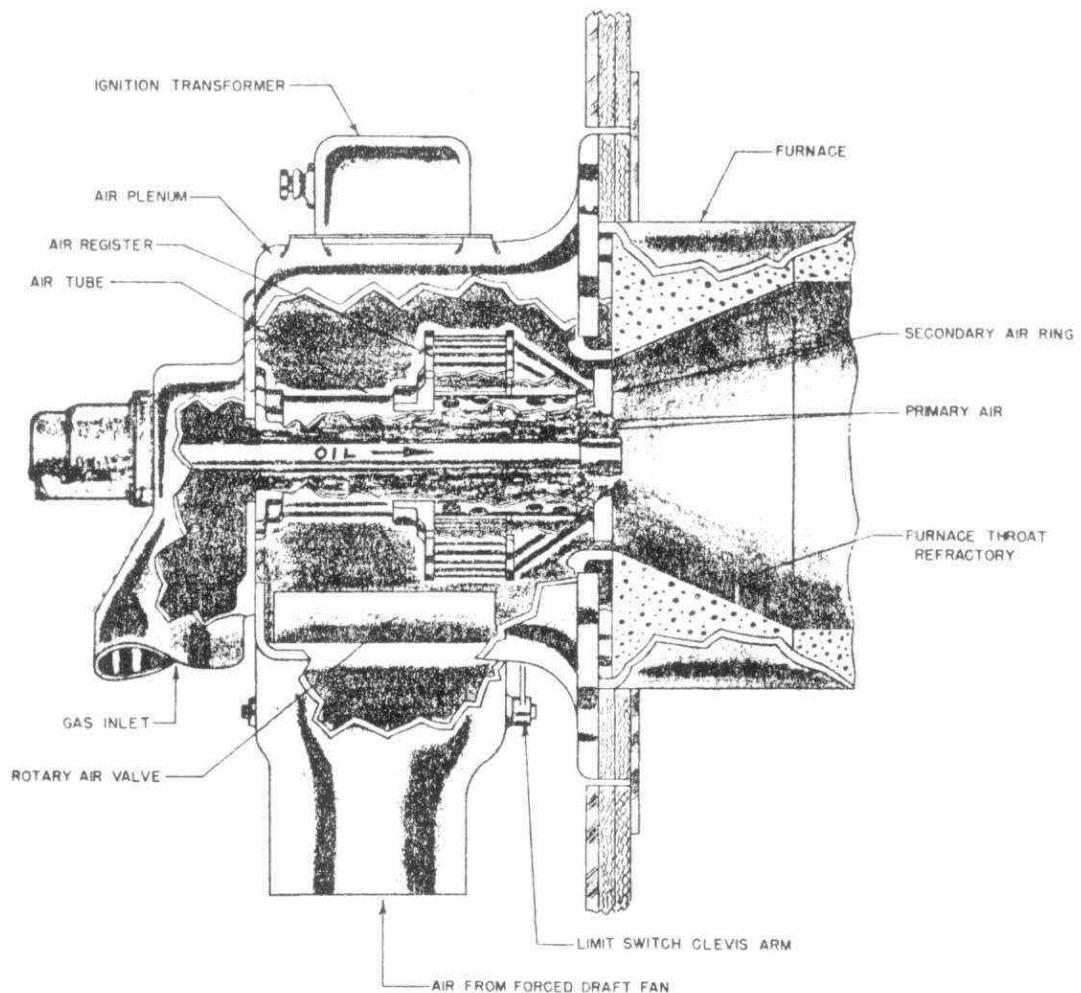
Model 3 Combination Gas - Oil Burner Assembly
